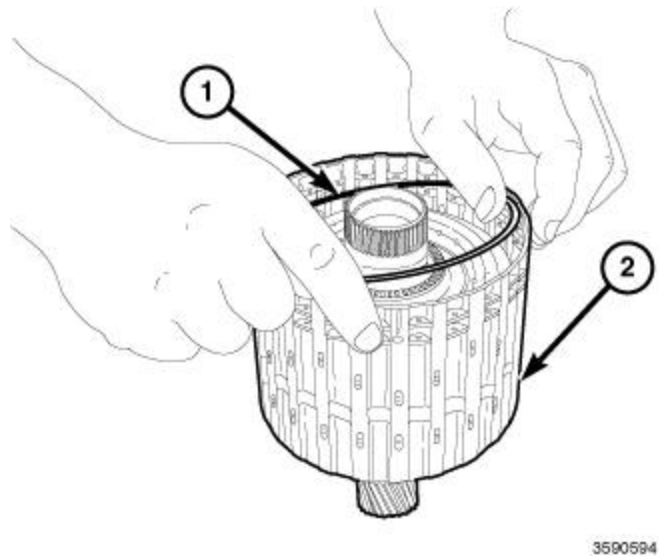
Snap Ring & P4 Sun Gear/C/E Clutch Retainer
